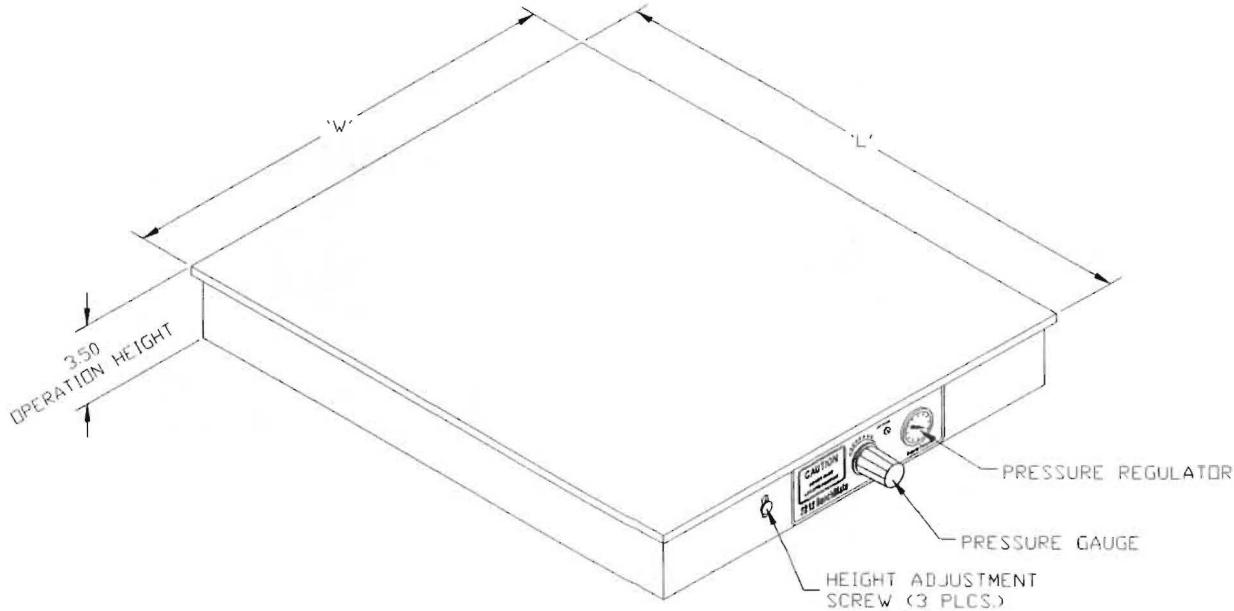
Outline View of 2212 VIBRAPLANE Platform.
